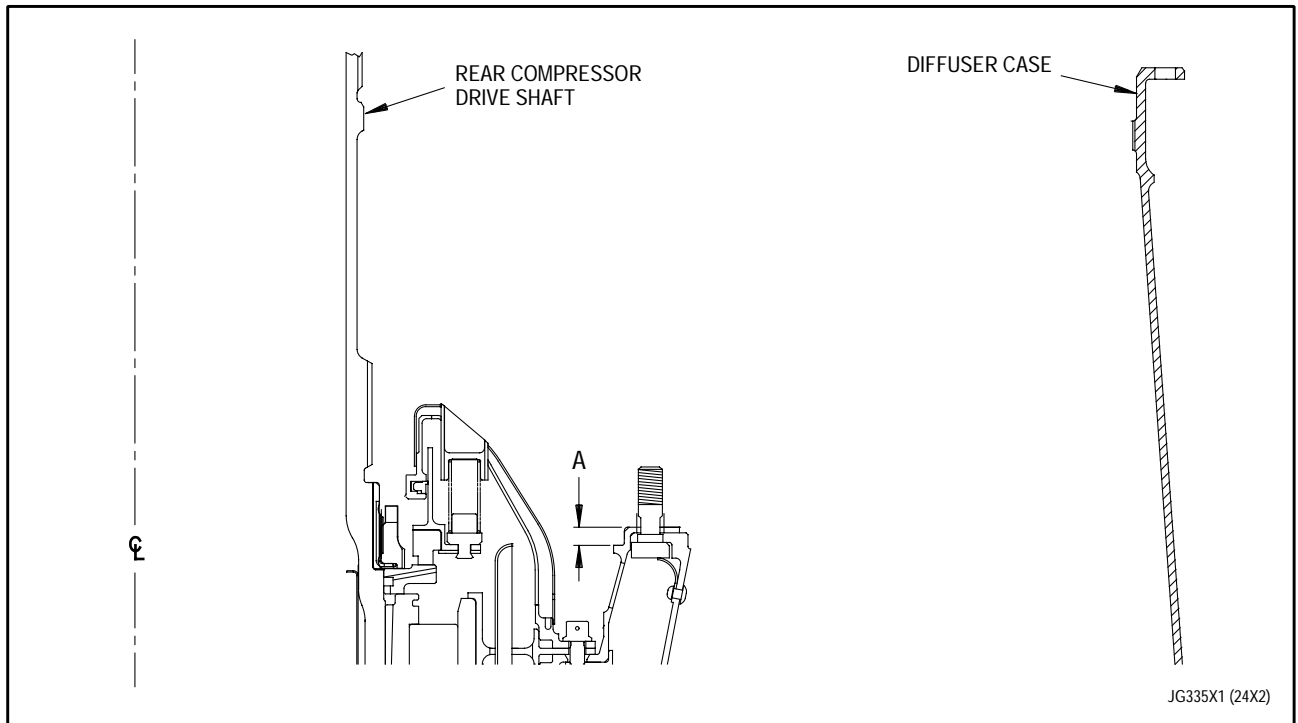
Dimension A- Front Seating Surface of First Stage Turbine Stator Support to the Seating Surface of No. 4 Bearing Rear Air Seal Ring
